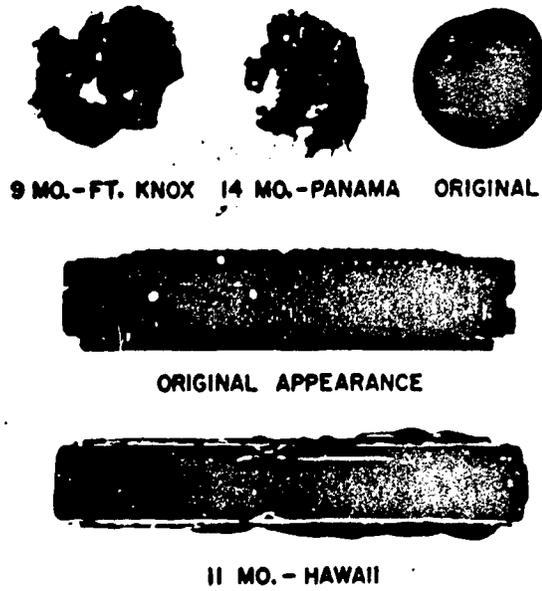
Deterioration of urethan items in service. Bellows and machine gun forearm assembly.
